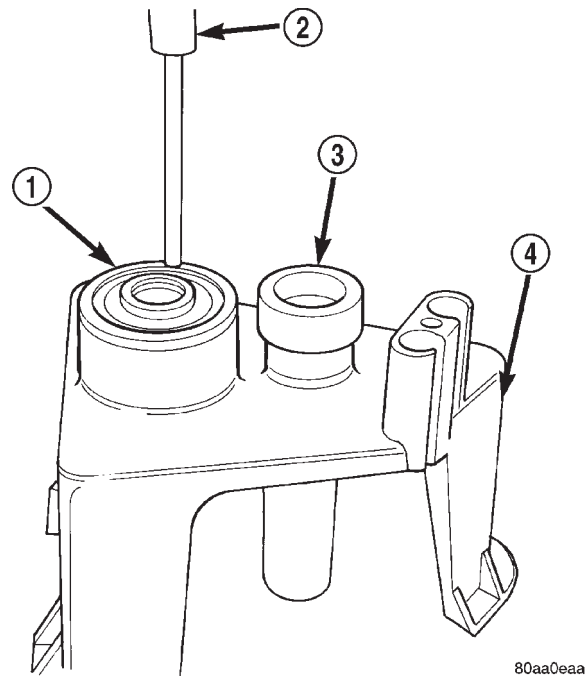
Preparing Assembly Fixture For Geartrain Build-up
